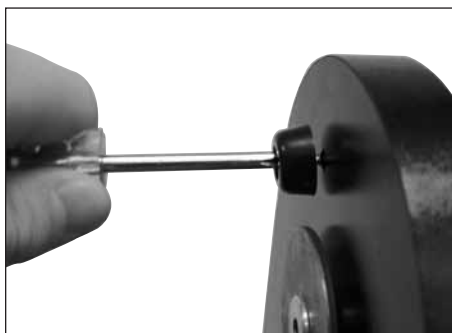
Install the bumper into the pilot hole above the altitude encoder assembly.
